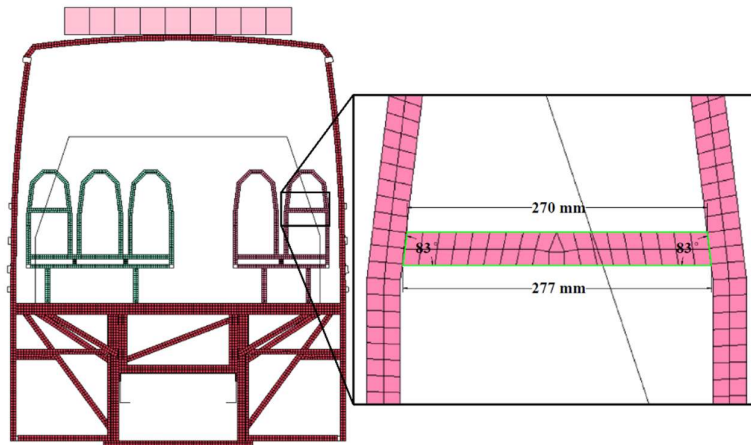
Illustration of seat reinforcement by adding a horizontal bar.
